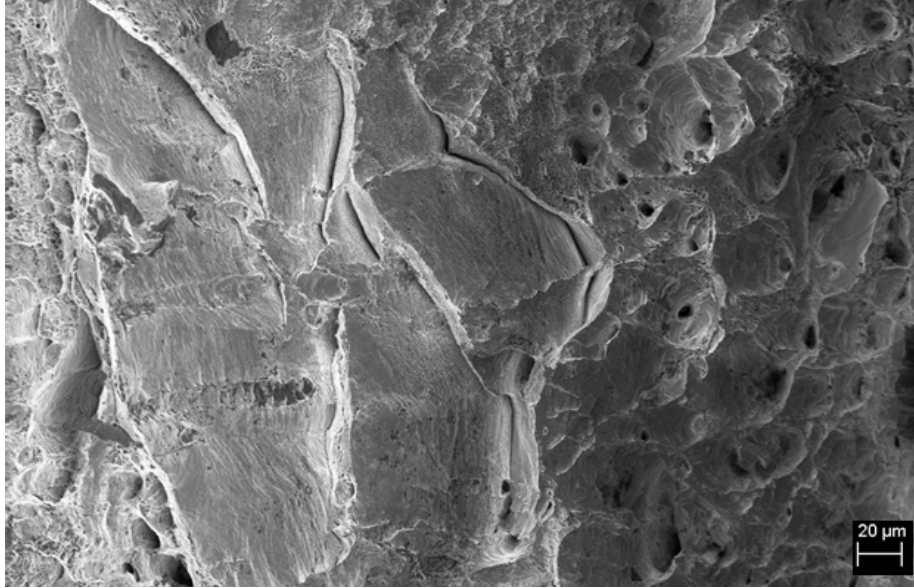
Scanning electron fractograph of Grade 441 weld metal. The figure is representative for a tensile coupon consisting of 50% weld metal. Ductile dimples, cleavage fracture and intergranular fracture was observed. (Weld ID: BD12010, with an electrode tip angle of 30°, pulse frequency of 30Hz, peak welding current of 120A and a welding speed of 10 mm/s. The sample had 54% equiaxed grains and a 19% elongation).
